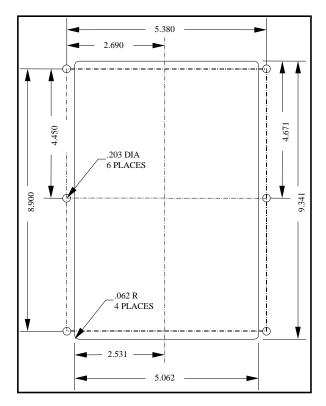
PANEL CUTOUT DIMENSIONS (INCHES)
